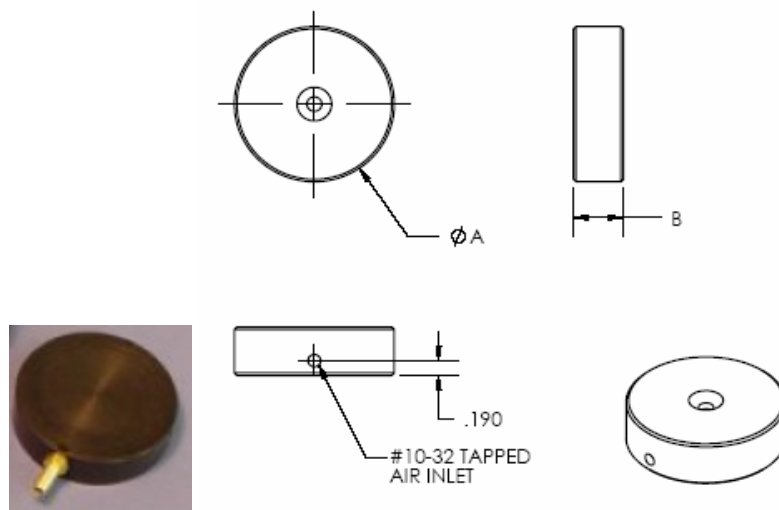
Aerostatic bearing pad [after Nelson Air Corp.]
